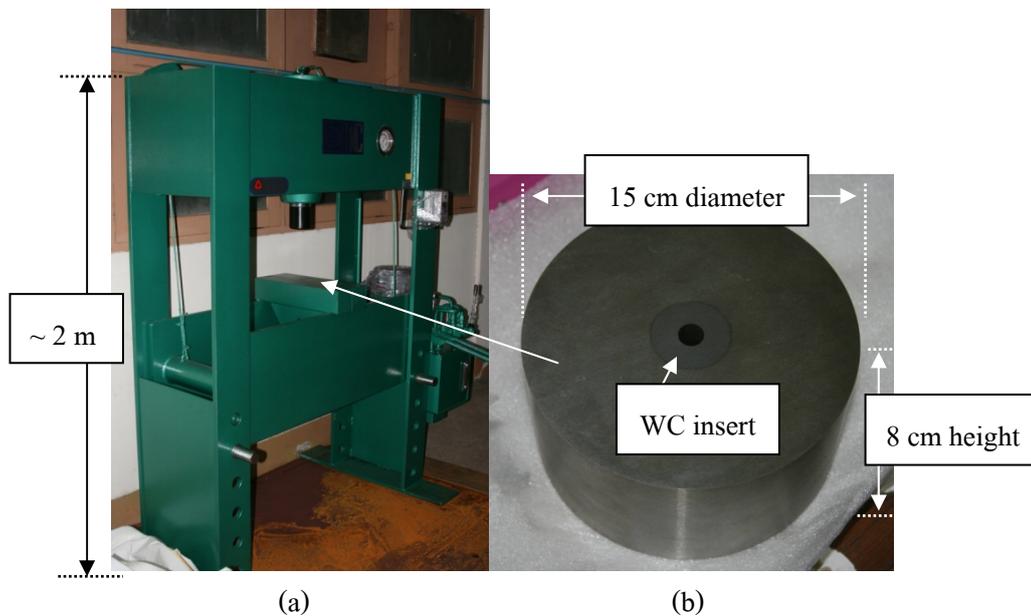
(a) 100-ton hydraulic press machine and (b) the mould (made of tungsten carbide insert into Cr12 steel body with HRC 58)
